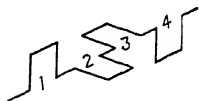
Conventional crank-arm arrangement in the eight-cylinder V-engine.
